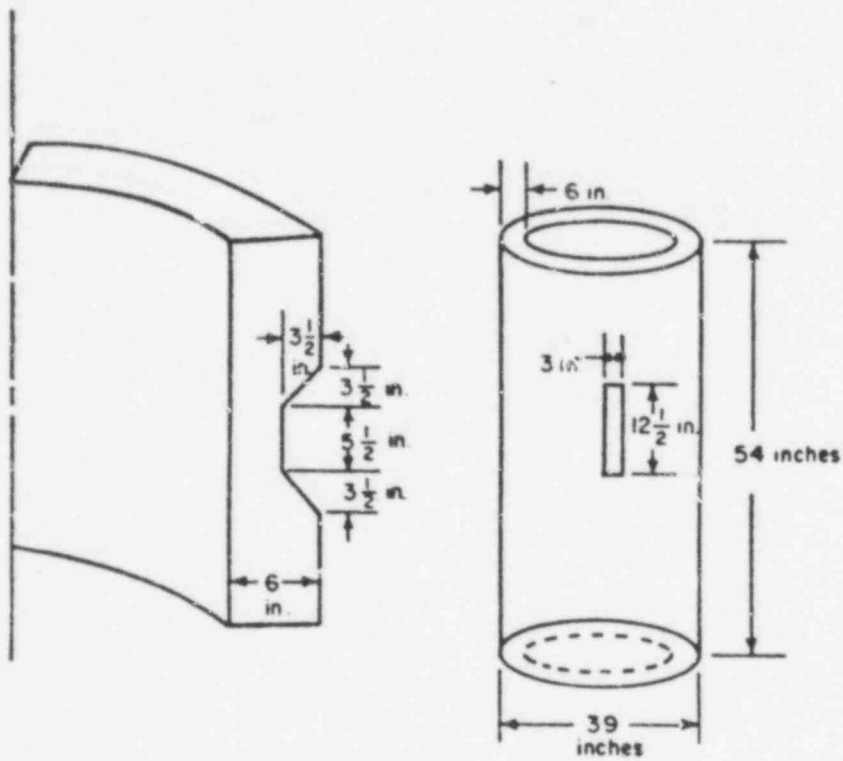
ILLUSTRATION OF WELD REPAIR CAVITY IN CYLINDRICAL SECTION OF HSST INTERMEDIATE VESSEL V-8
